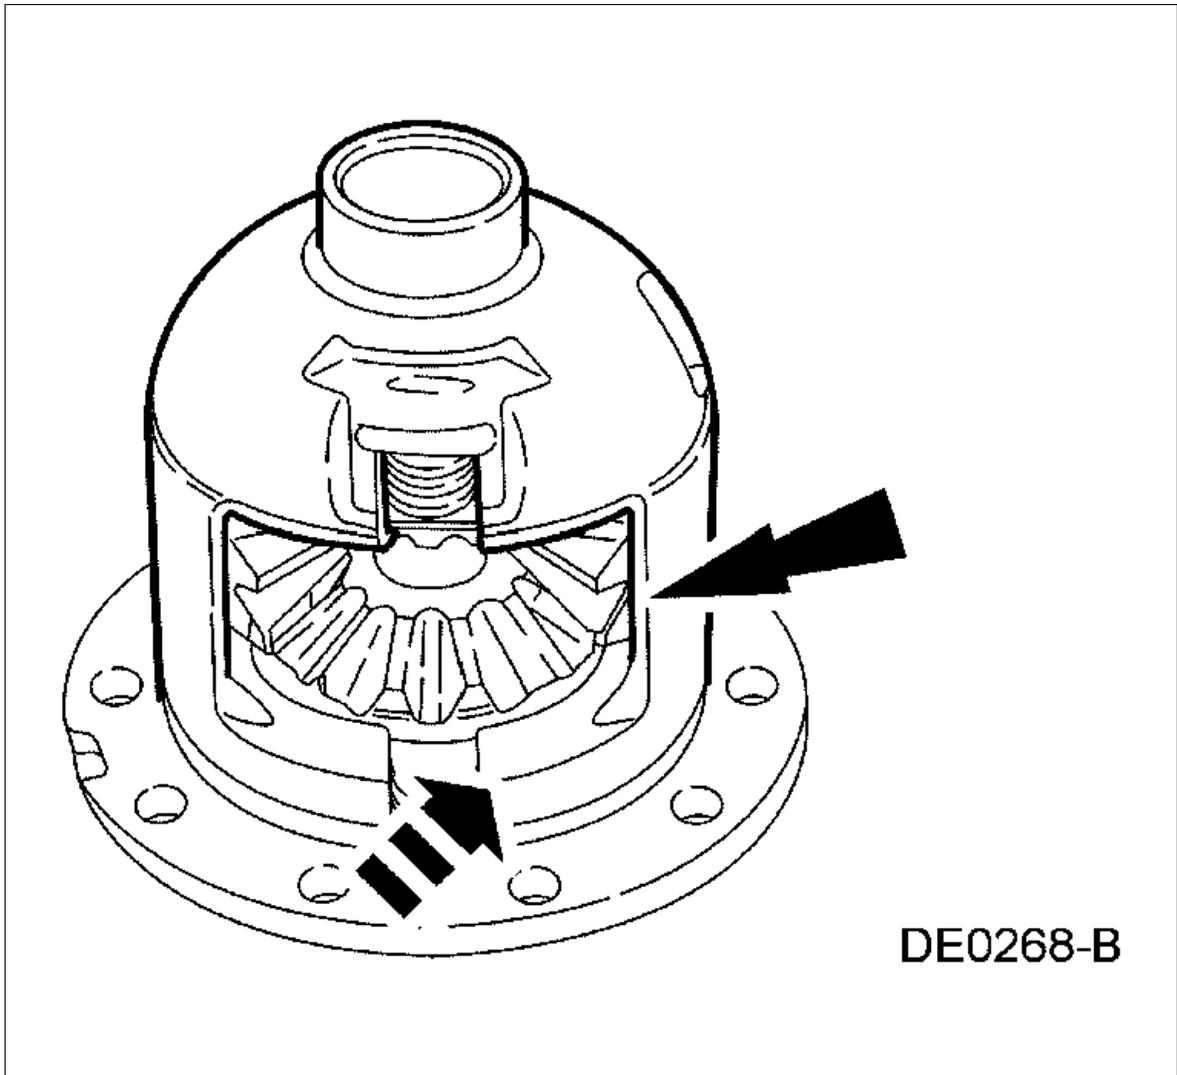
Installing Differential Side Gear Assemblies In Differential Case
